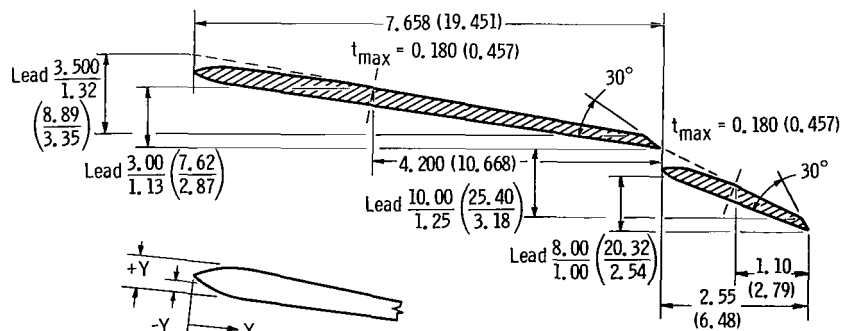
Blade section (front and rear blades) at 6.5-inch (16.51-cm) tip diameter. Leading edge radius, 0.010 inch (0.025 cm).
